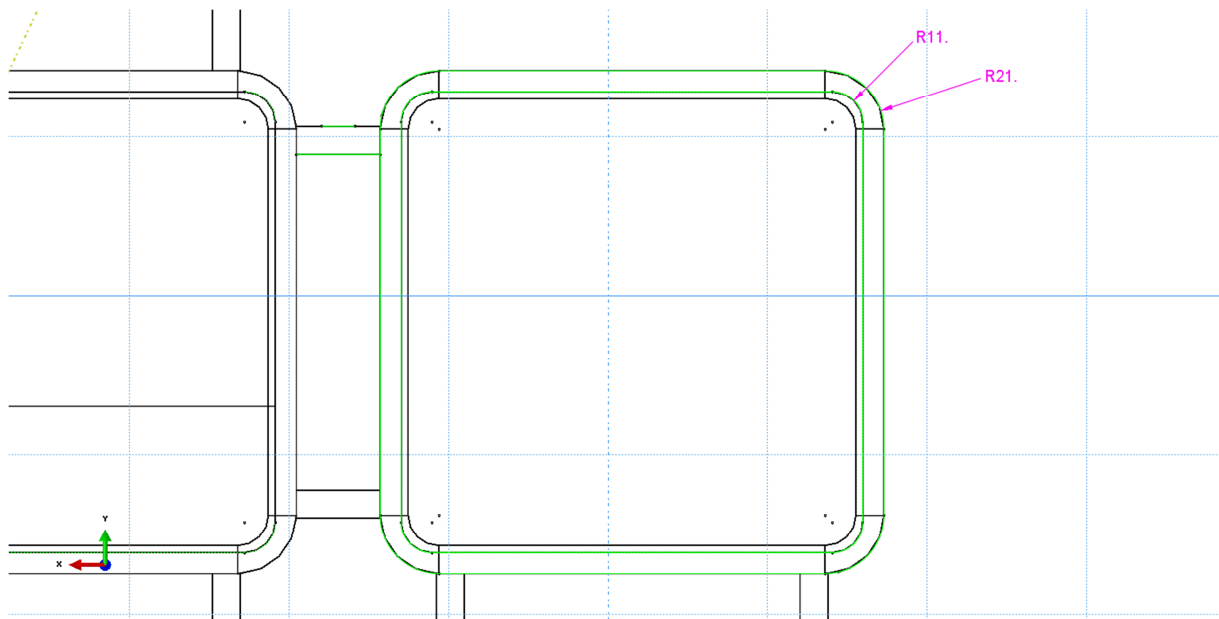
Plot showing corner radius for the channel tubes. Also the modified geometry for the support plates with the weld are included could be noticed. Also note that the inner weld string from manufacturing of welded (shown at the CAD-drawing) tubes have been removed.
